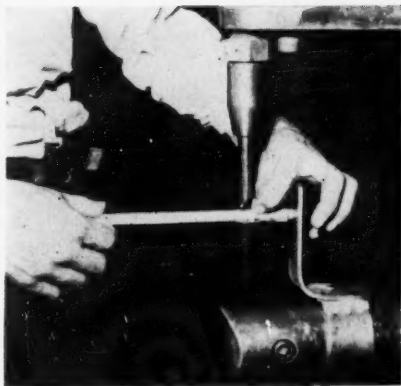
Small pointer held in operator's left hand had to be spot welded to tubing in right hand. Lower electrode is inside tubing, held in place by clamp-like fitting. Micarda block below tubing supports electrode.
